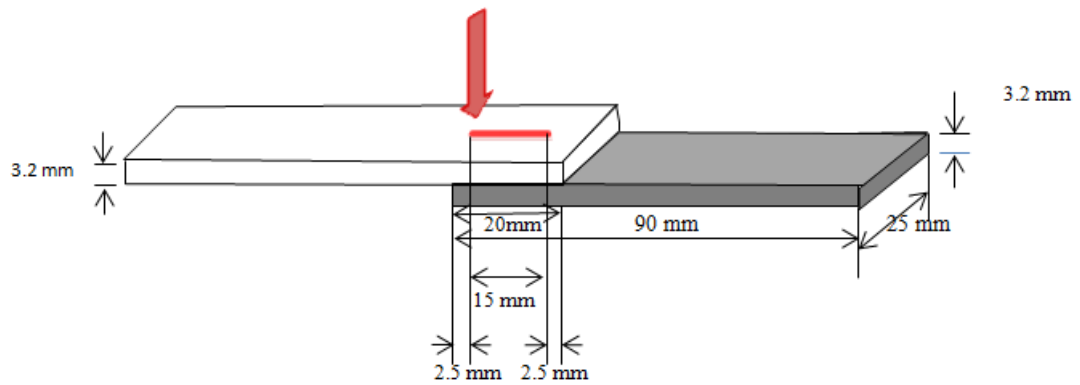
3: Dimensions of the lap shear weld specimen
